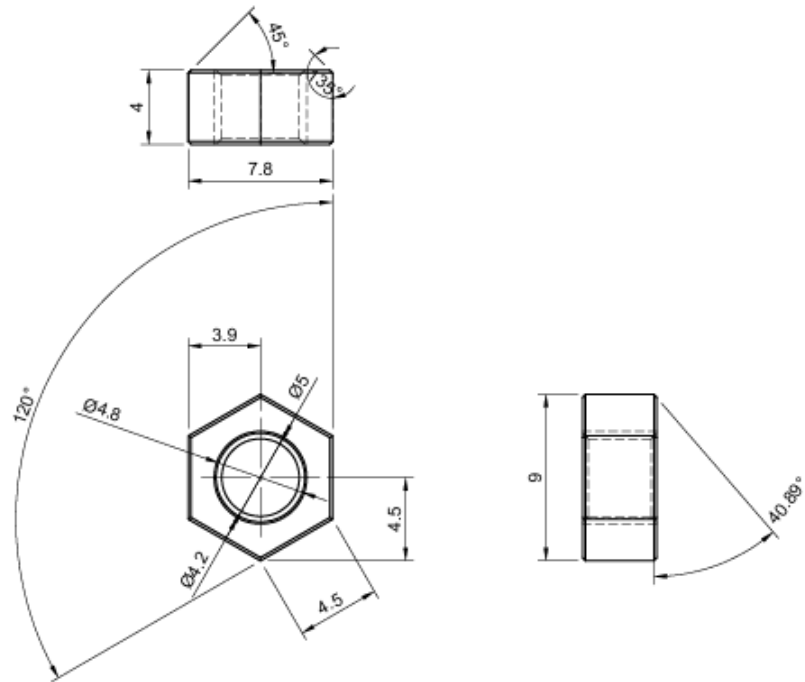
Nut (Female Fastener) CAD Drawing and Dimensions Part 9
